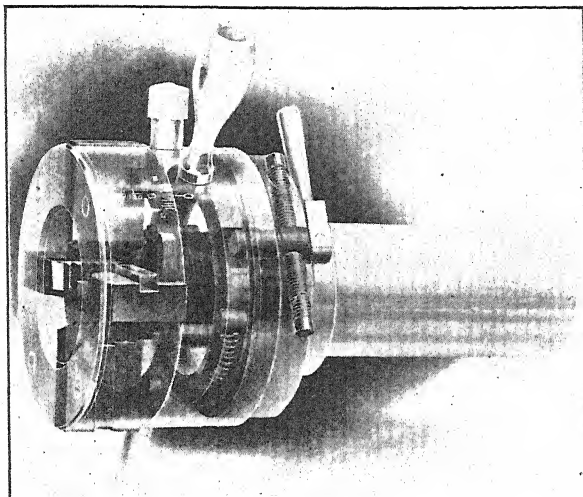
A Phantom View of the Geometric Tool Co. Self-Opening Die Head Containing Four Radial Chasers.
